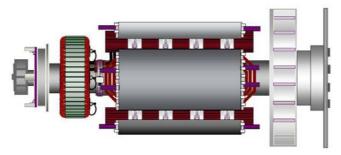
SINGLE BEARING ALTERNATOR ROTOR SHOWING COUPLING DISCS BOLTED TO DRIVE END COUPLING HUB (AT RIGHT)
